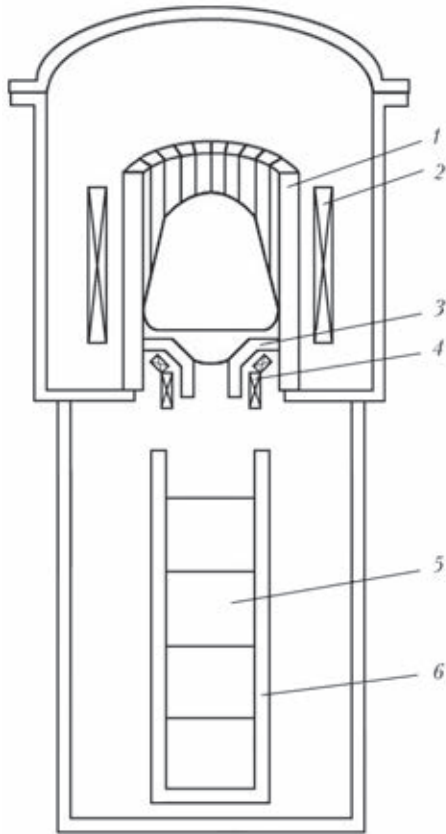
The scheme of levitation melting in a cold crucible with a bottom release of the metal [24]: 1 - cold crucible (sectional mold) 2 - melting coil, 3 - outlet, 4 - discharge inductor; 5 - bar 6 - mold.
